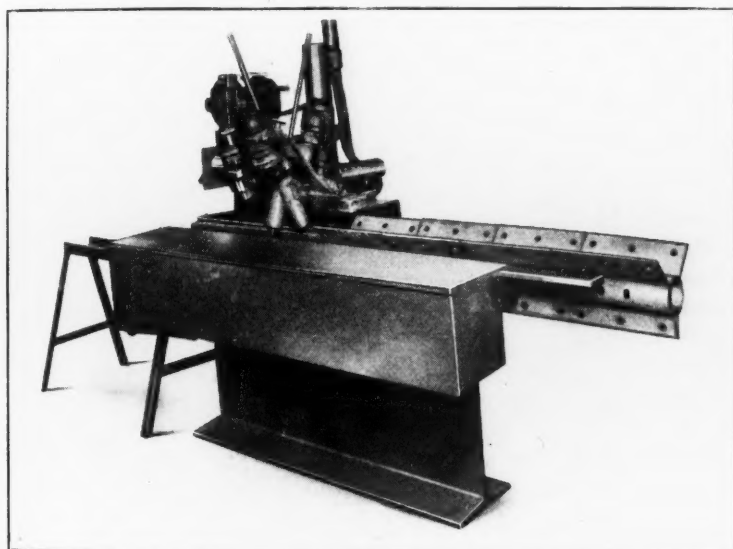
Lincoln Welding Machine which Operates on the Electronic-tornado Principle
